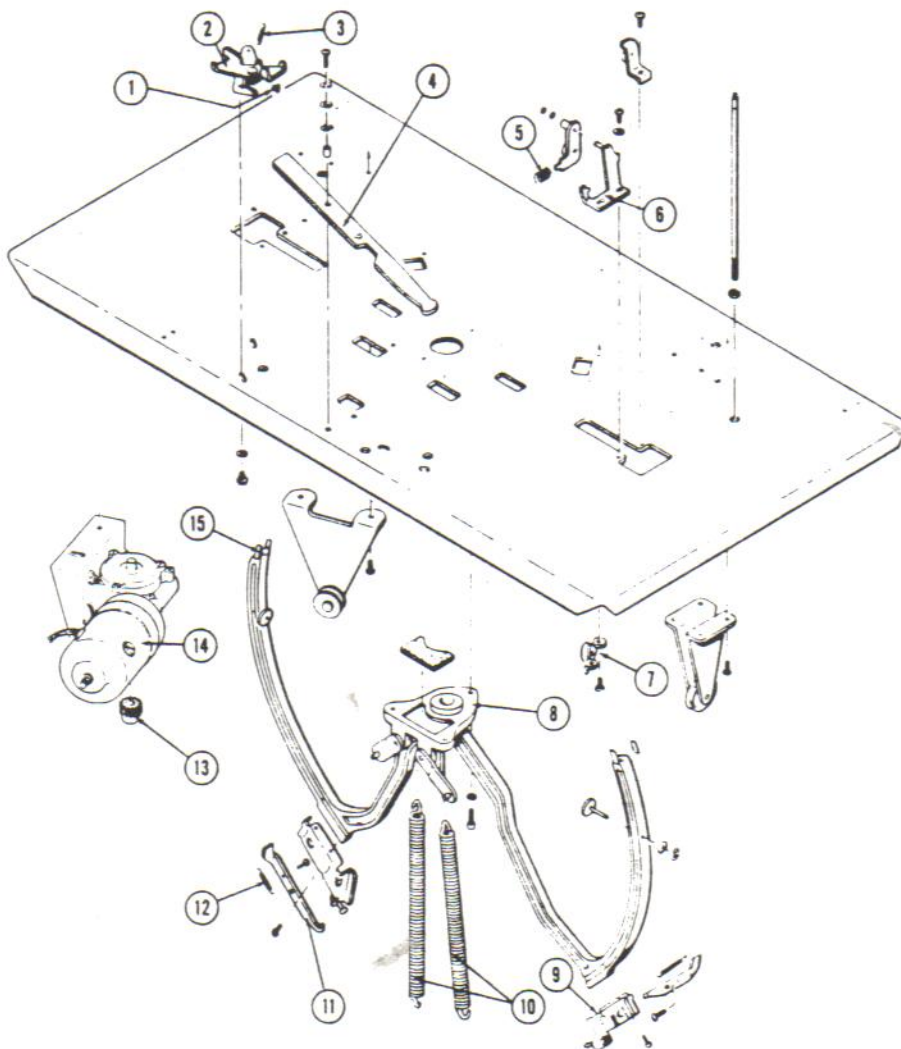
CHASSIS MOUNTING PLATE, PIVOT CASTING AND ARM ASSEMBLY
